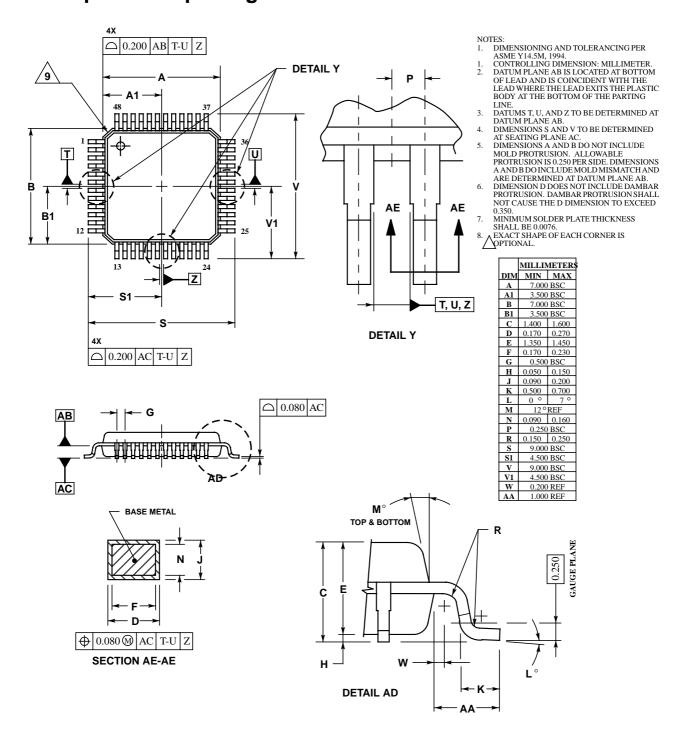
48-pin LQFP Mechanical Dimensions (case no.932-03 ISSUE F)
